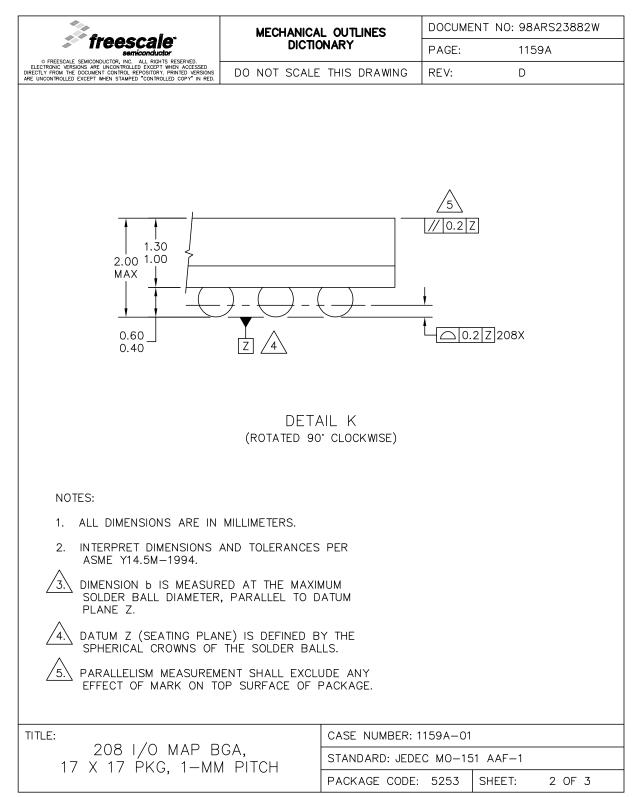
208 MAPBGA Package Mechanical Drawing (part 2)
